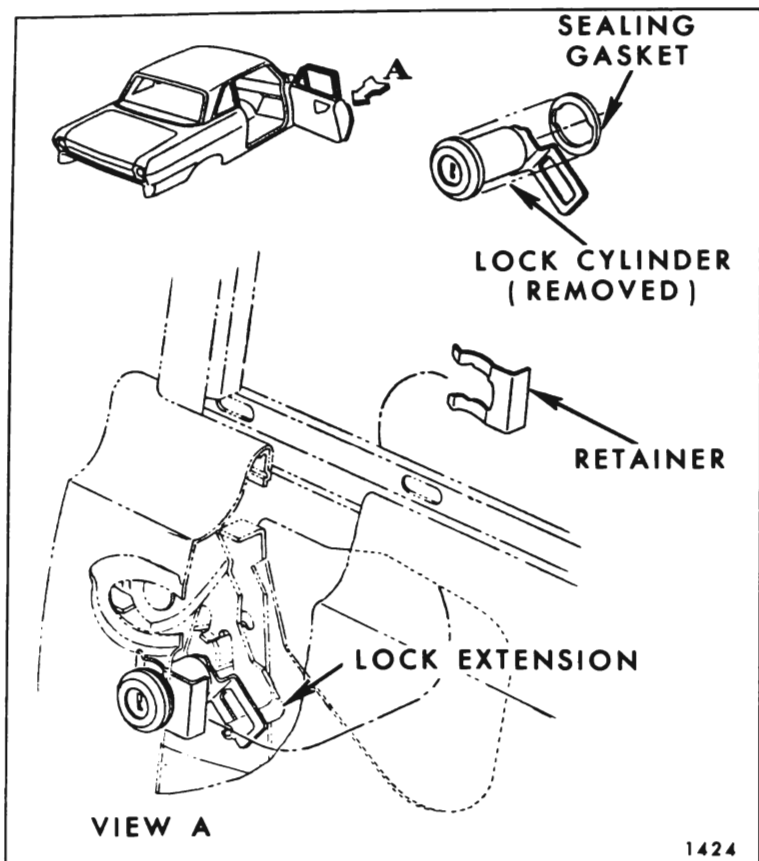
Front Door Lock Cylinder Removal - "X" Styles Shown - Others Similar
